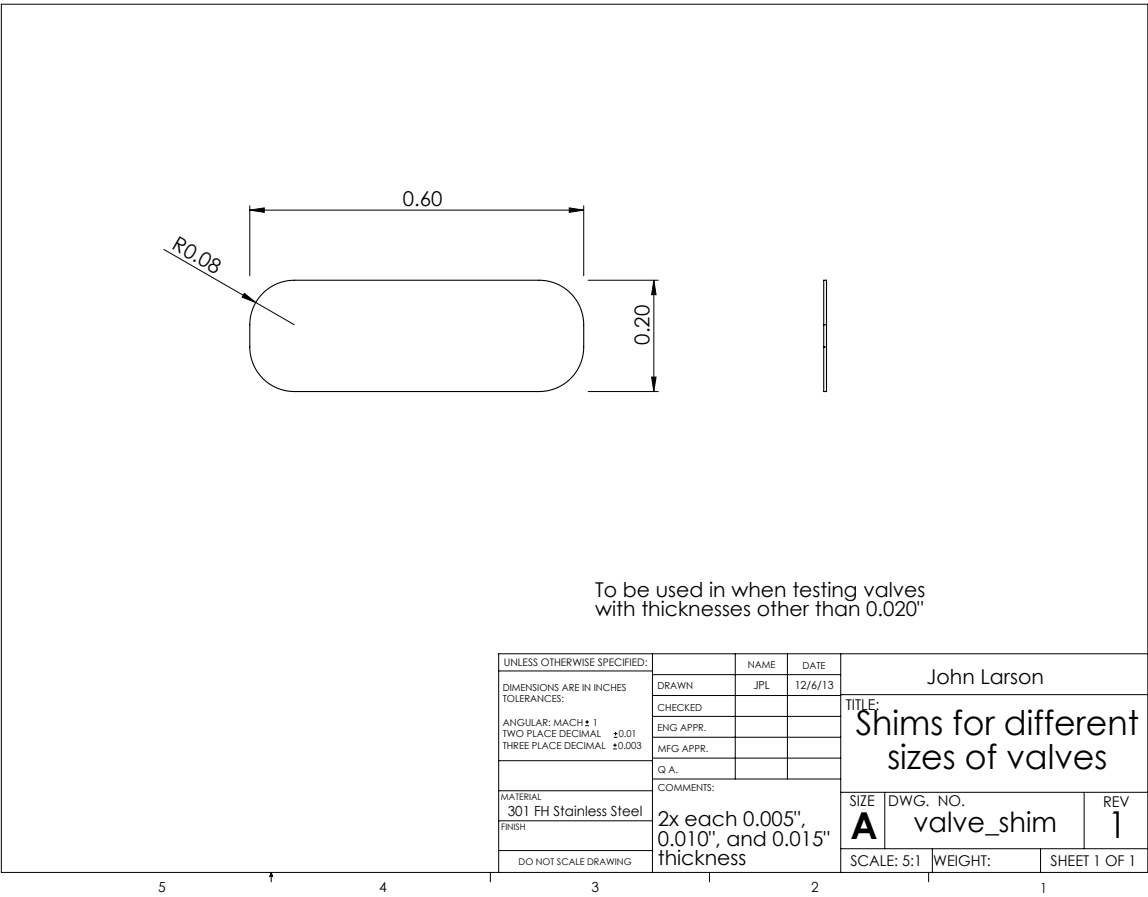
Spacer dimensions used to clamp down valves thinner than 0.51 mm
